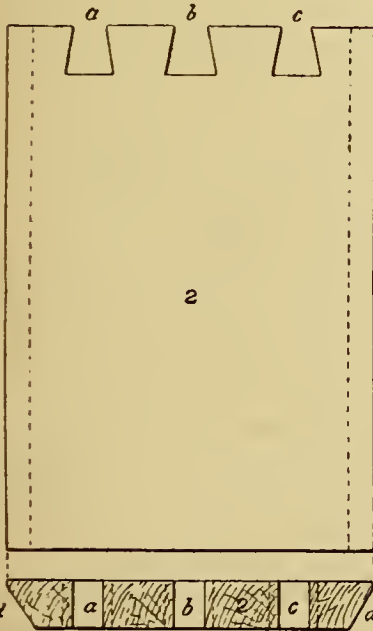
UPPER PART, OR SLIDE, OF BRACKET FOR BORING REST. One in Number.
